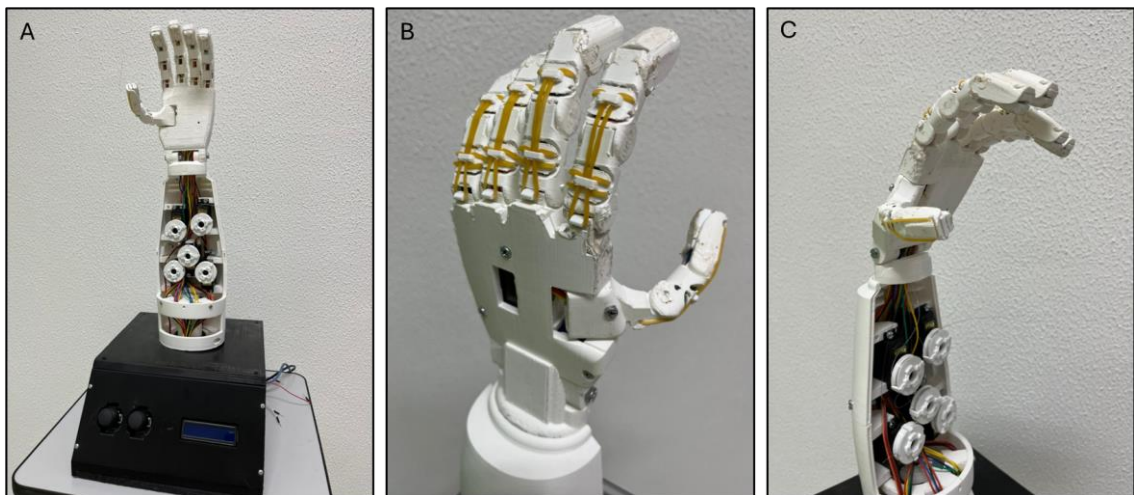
Assembled model (A) front view (B) of the hand back view (C) side view.
